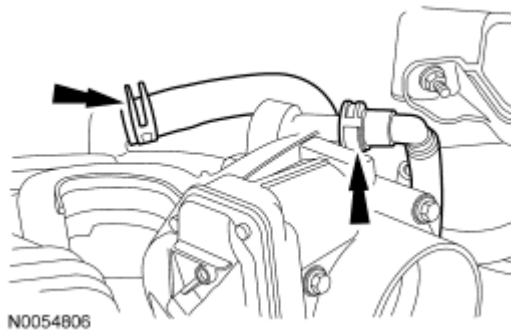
Locating Vacuum Hose & Evaporative Emissions (EVAP) Tube From Upper Intake Manifold
